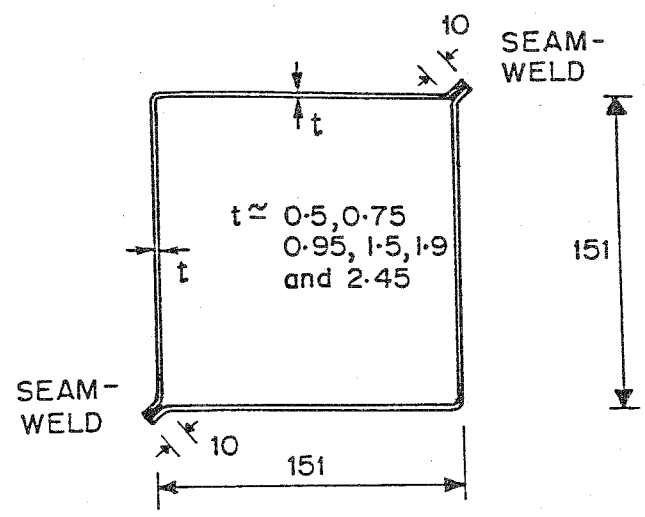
Cross-sectional Dimensions of A Typical Box-Specimen
